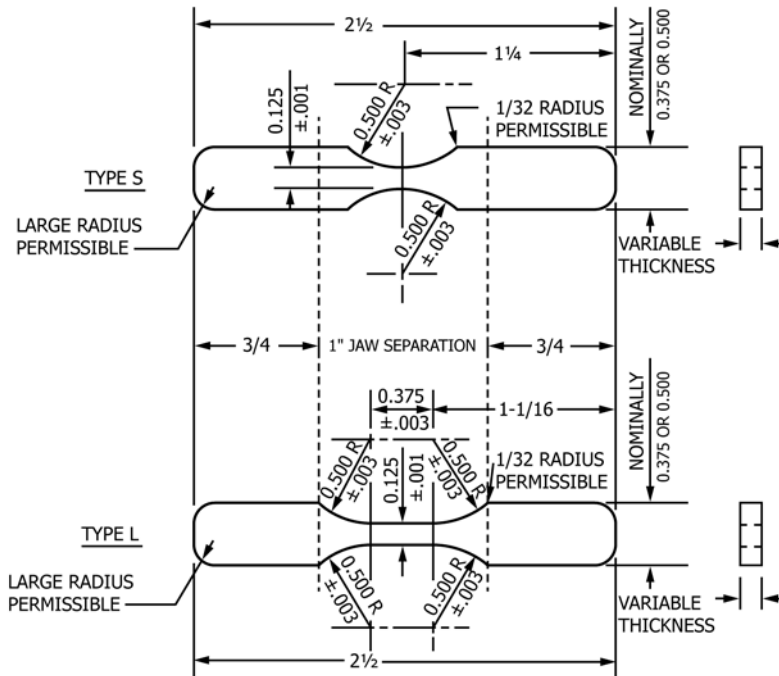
B Mold Dimensions of Types S and L Tension-Impact Specimens (Dimensioned in Inches)
